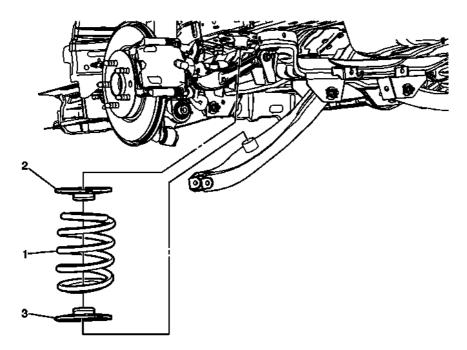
Rear Spring, Insulator & Jounce Bumper Courtesy of GENERAL MOTORS COMPANY
